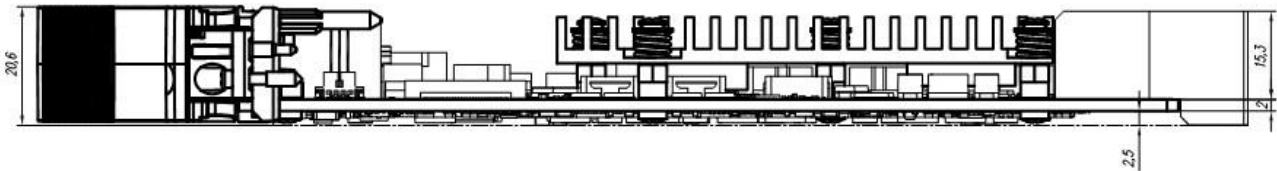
CPC512 module with the installed R1 4HP heatsink (side view)
